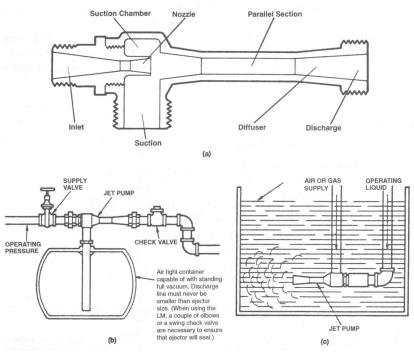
Utility ejector, two-piece, male fittings: (a) construction; (b) producing a vacuum; (c) aeration or agitation. (*Courtesy Penberthy Division of Stanwick Industries, Inc.*)
